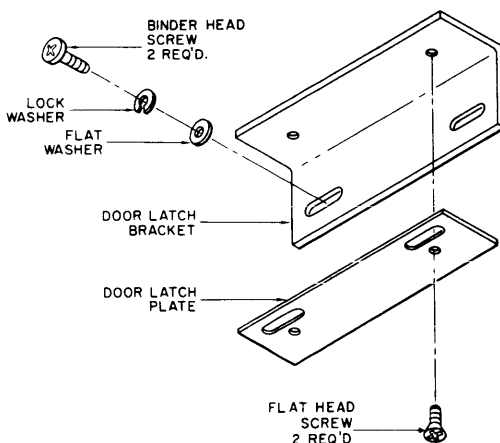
Door Latch Plates and Brackets, Installation Diagram
